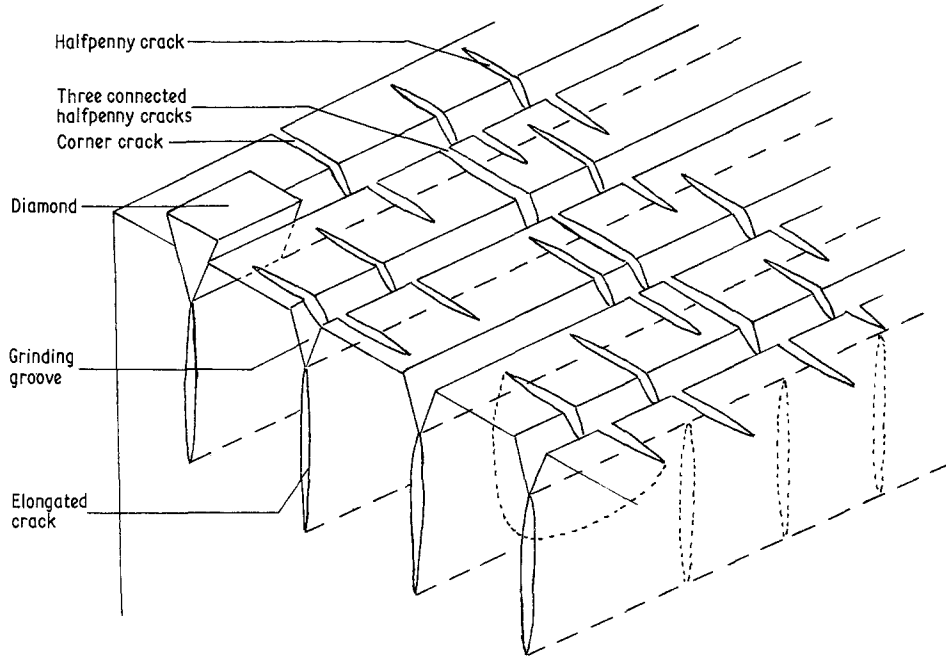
Elongated and halfpenny-shaped surface cracks caused by grinding with a diamond tool.
